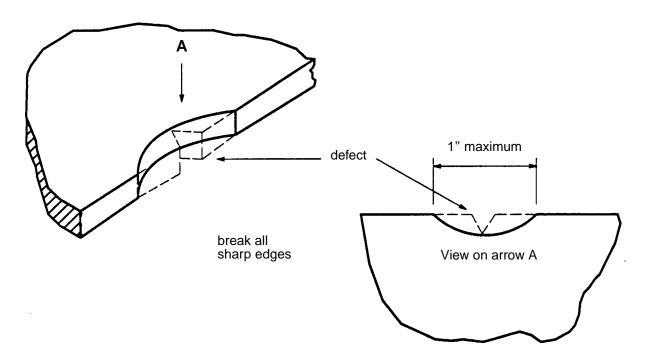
REPAIR OF TYPE 2 AND TYPE 3 DEFECTS ON EDGES
